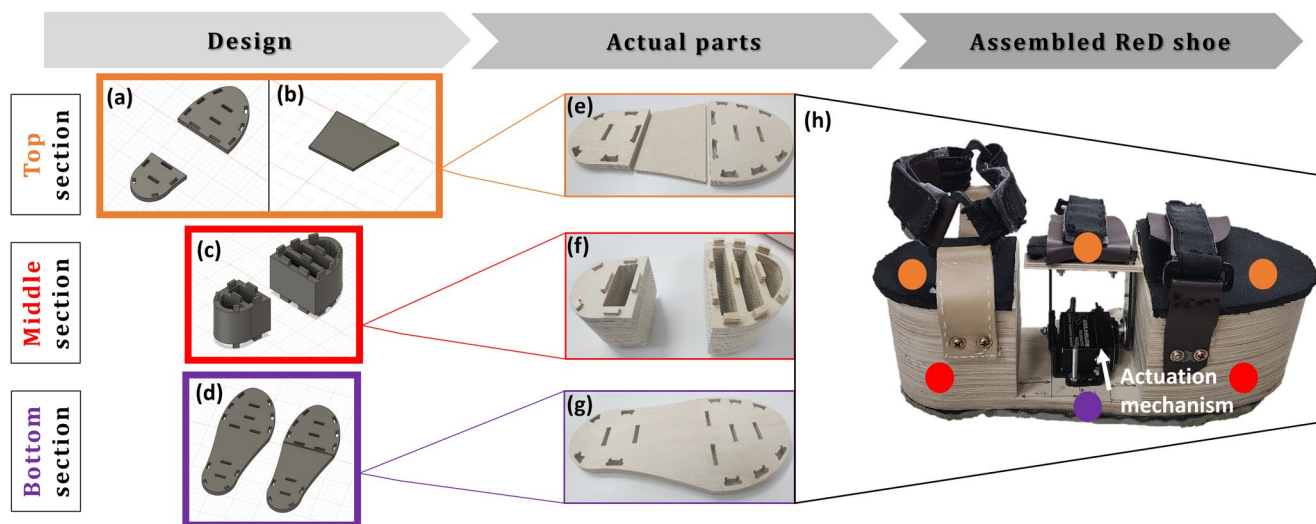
Design and assembly of the ReD shoes: a stationary parts of the top section, b moving part of the top section, c middle section with front and back stationary parts, d bottom section, e actual shape of the parts of the top section, f actual shape of the parts of the middle
